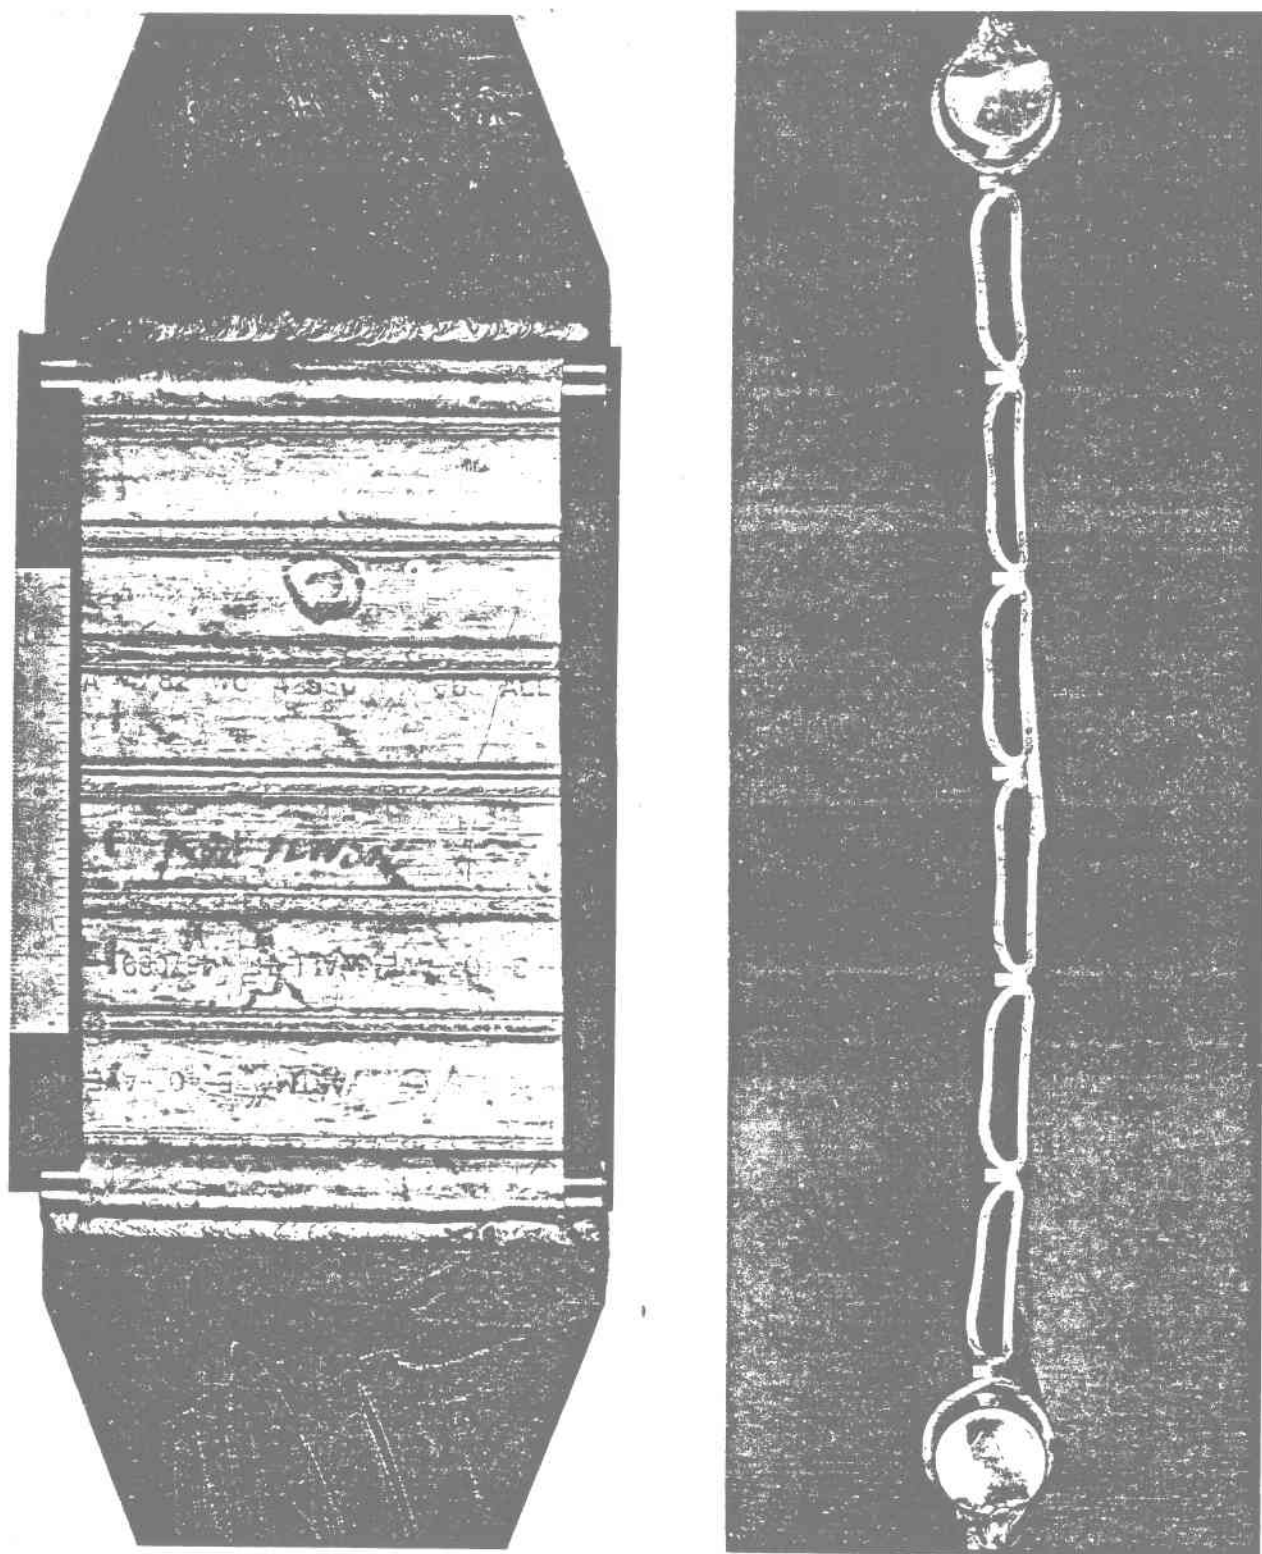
Front and Edge Views of Transverse Tensile Test Specimen After Test (Note fracture in adjacent-to-middle weld in HAZ of Tube)
